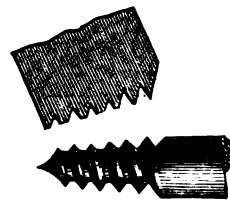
SCREW TOOL FOR CUTTING CONE THREAD.
